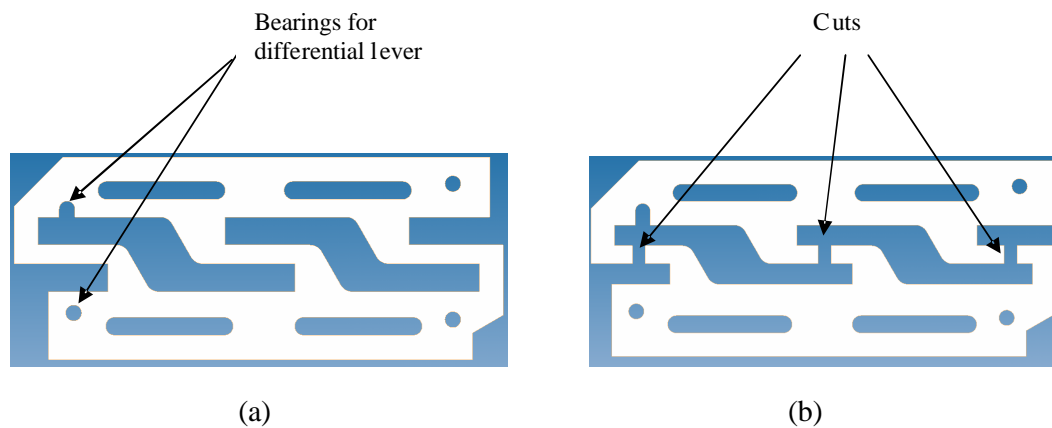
Tripping bars: (a) as a single piece; (b) after cutting
